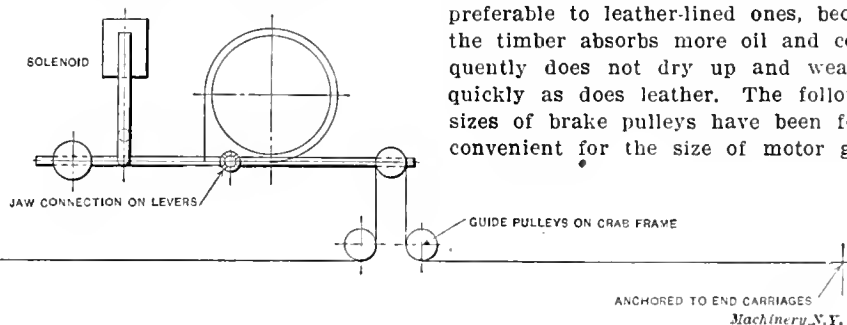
Solenoid Brake, which can be released and controlled by a Foot Treadle for Lowering the Load.
